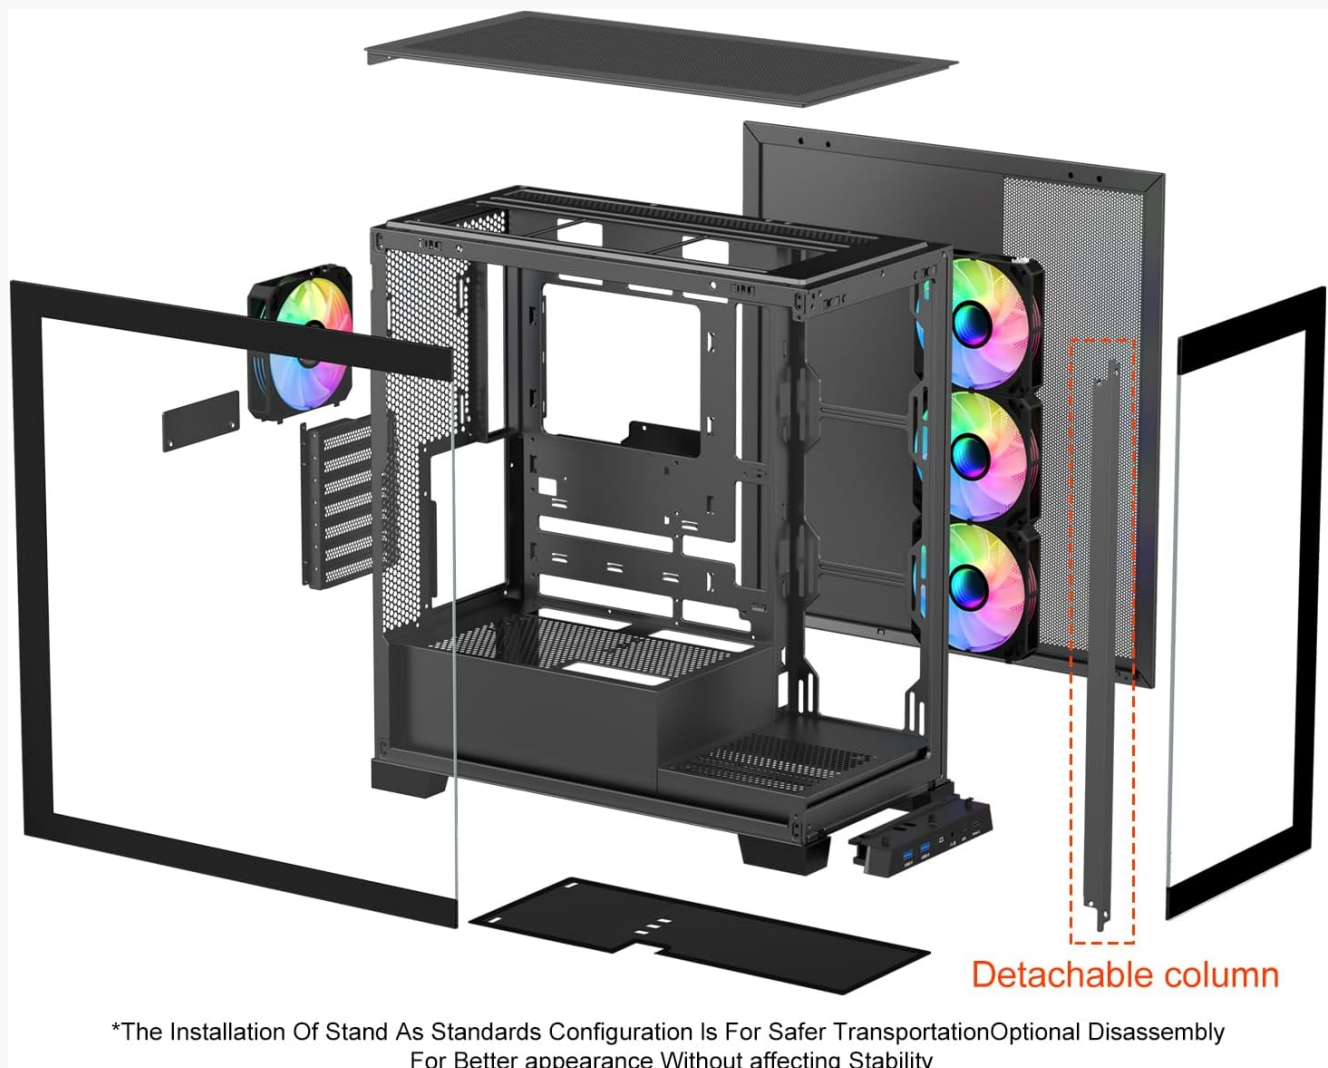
Exploded view illustrating the detachable components, including tempered glass panels and the internal structure.
